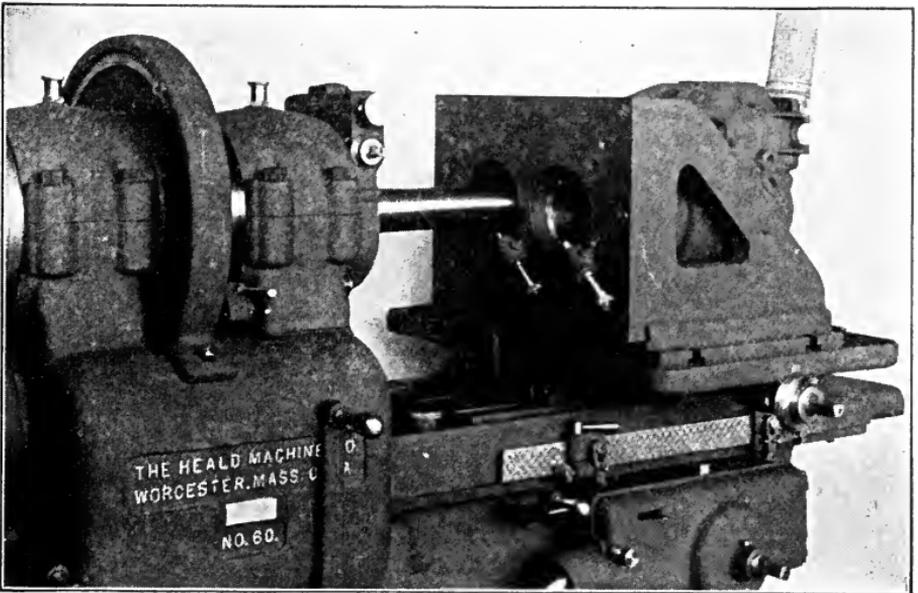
Grinding Gas Engine Cylinders. Same Set-Up as Fig. 331, Showing Holding Jig and Turning Tool at Mouth of Hole
